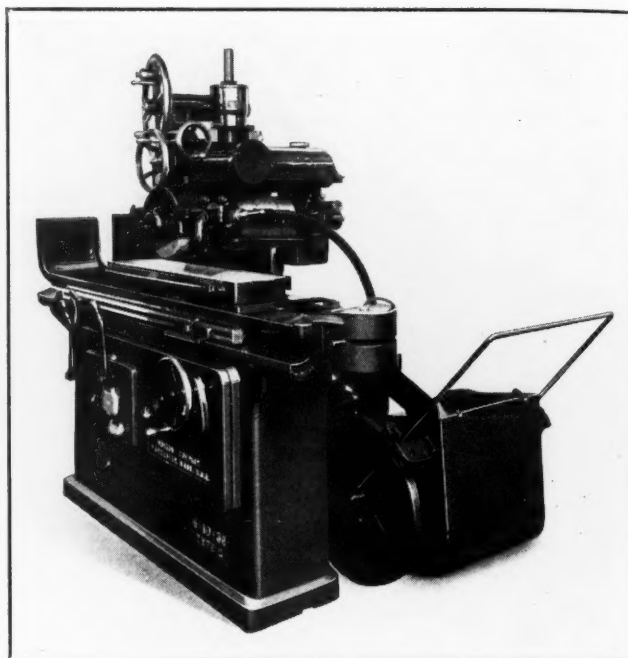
Newly designed Surface Grinding Machine developed by the Norton Co.
